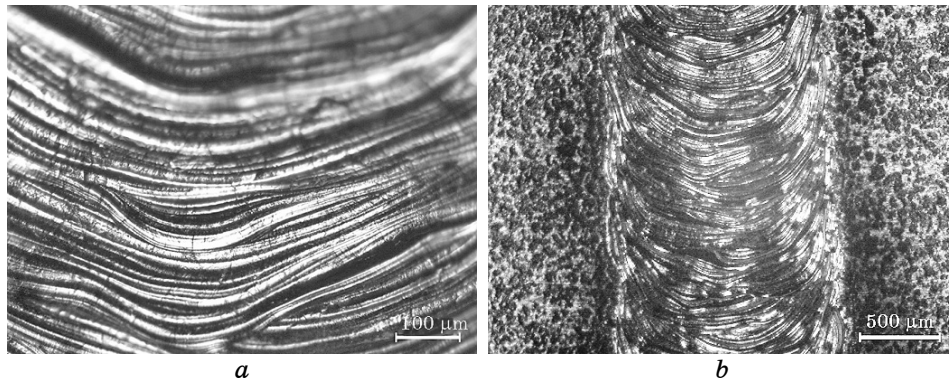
0.2 mm spot size of weld seams.
